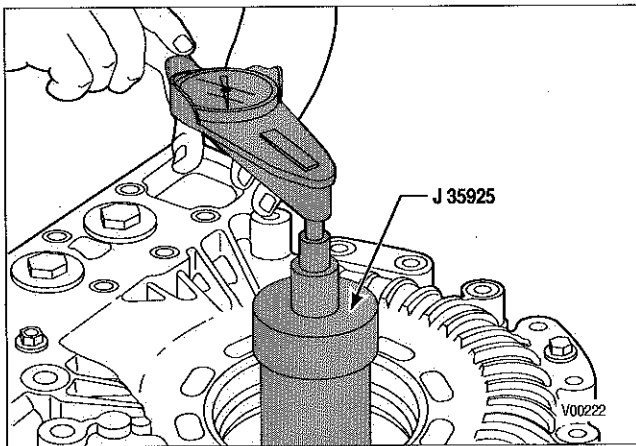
P3 Carrier Turning Torque Check—Retarder Equipped Models
